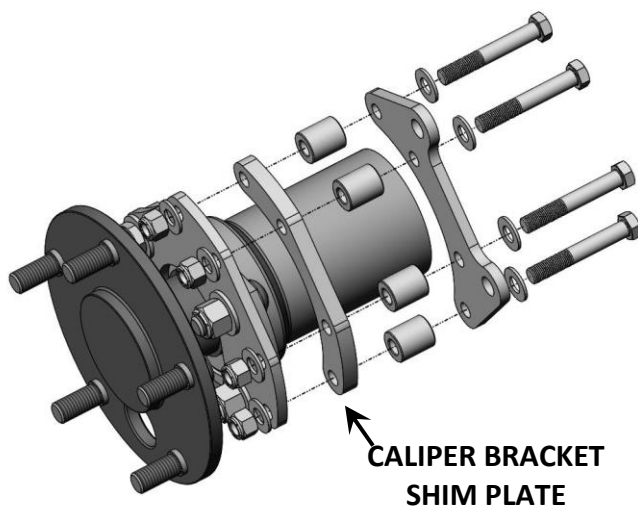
Caliper Mounting Bracket Installation (2.000" Standoff)
